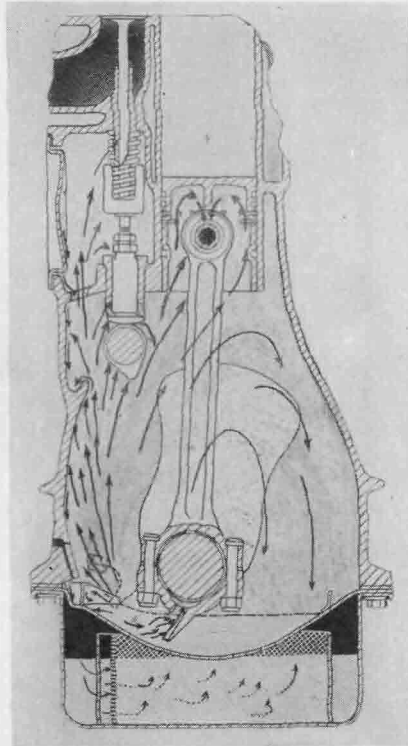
Splash lubricating system used on an in-line engine. An oil pump maintains the proper level of oil in the tray under the connecting rods.
